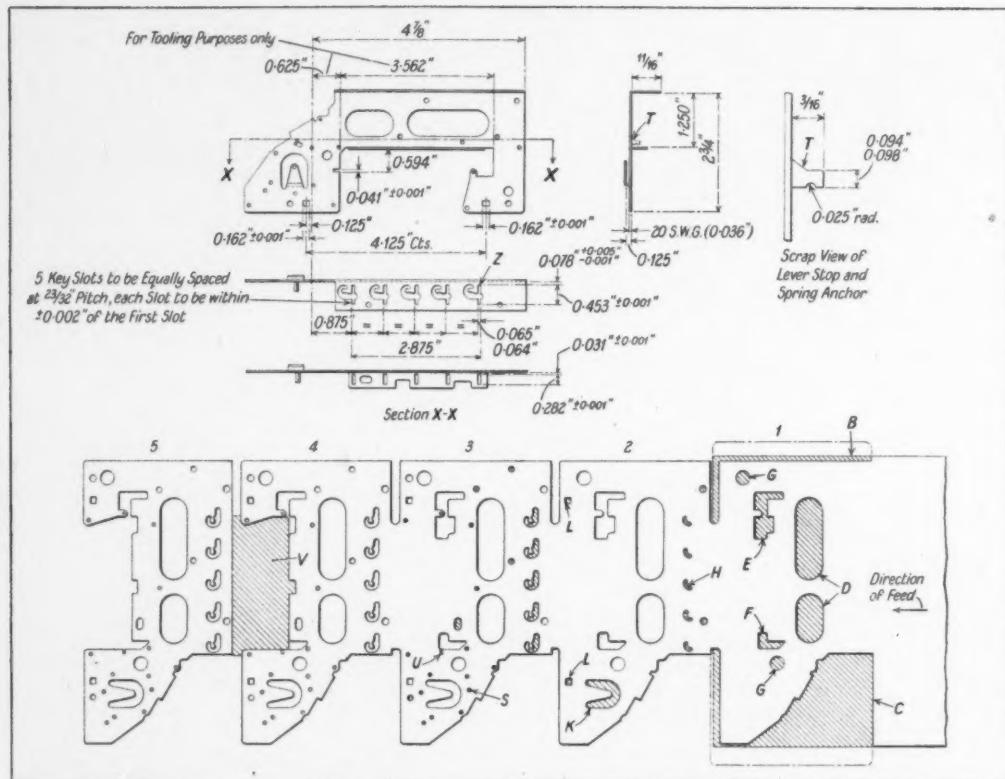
Details of the Frame Plate for a Plus Adding Machine, and a Diagrammatic Layout of the First Series of Pressing Operations, are Here Shown
